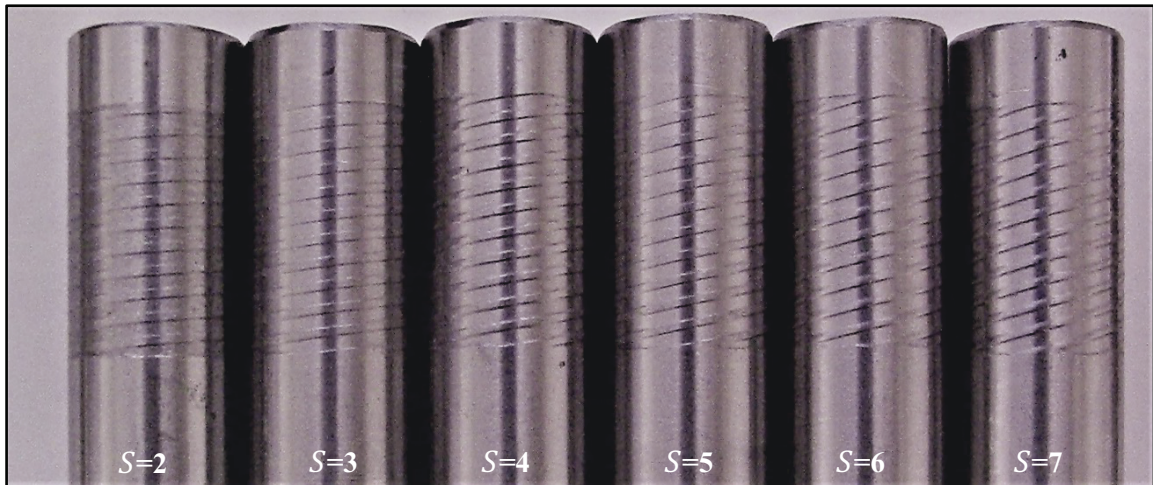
textured workpieces obtained after grinding with a grooved wheel
